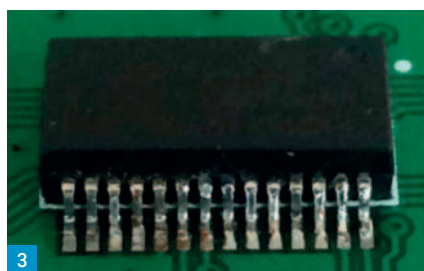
The kit on arrival. Fig. 2: The author's home-made tool for holding components in place. Fig. 3: The IC after soldering in place. Fig. 4: The finished toroids in place. Fig. 5: The assembly after 3D printing some suitable supports. Fig. 6: 3D printed insulating bar. Fig. 7: VSWR curve for the balun. Fig. 8: The balun boxed up. Fig. 9: Inside the finished ATUBox. Fig. 10: The ATUBox in situ.
